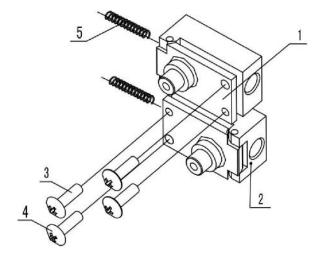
(1) Driven Wheel Seat (Adjusting Block), (2) Driven Wheel Seat (Adjusting Block), (3)/(4) Adjusting Screws, (5) Springs
